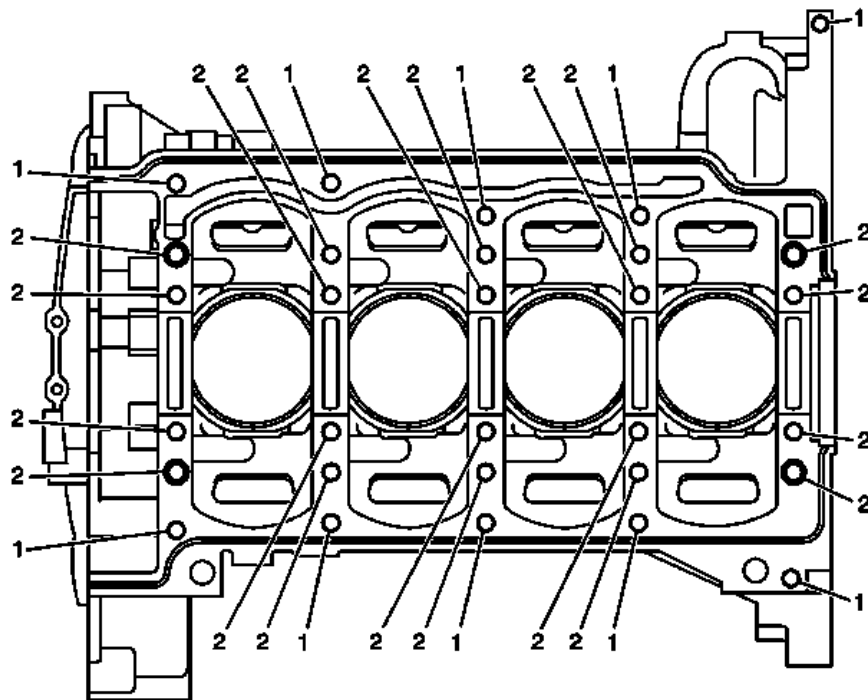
Identifying Bolt Size & Locations On Engine Block - Bottom
